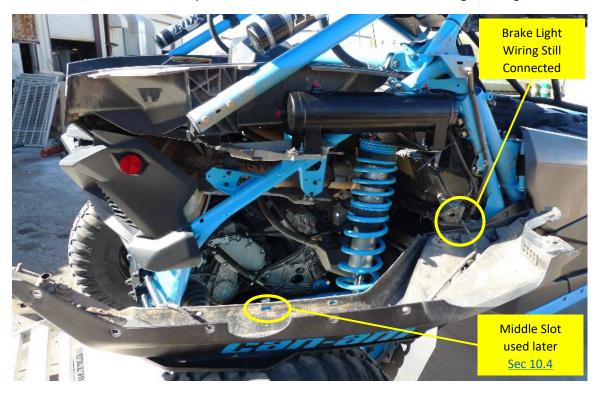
Passenger Rear Fender Removal (fender resting on tire); Air Tank shown installed
